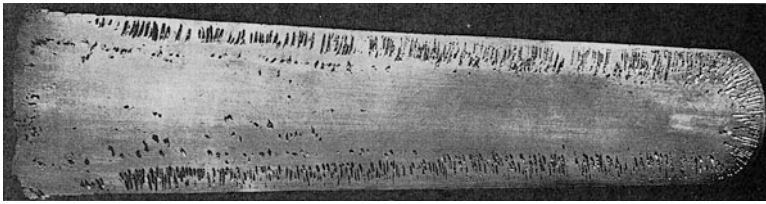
Cross-sectional view of rimmed steel ingot. Two typical solidification defects are observed; top part is shrinkage cavity and surroundings are gas pores [2]
